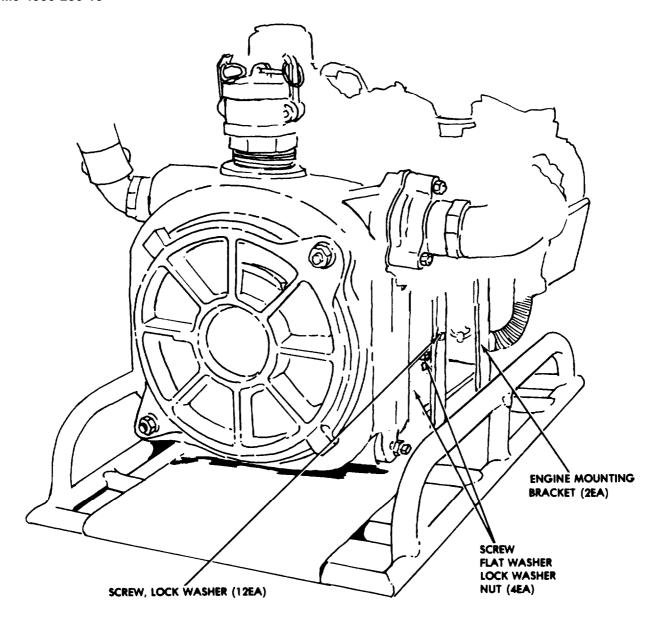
Pump and Engine Assembly, Removal from Mounting Base. (Pump side),
